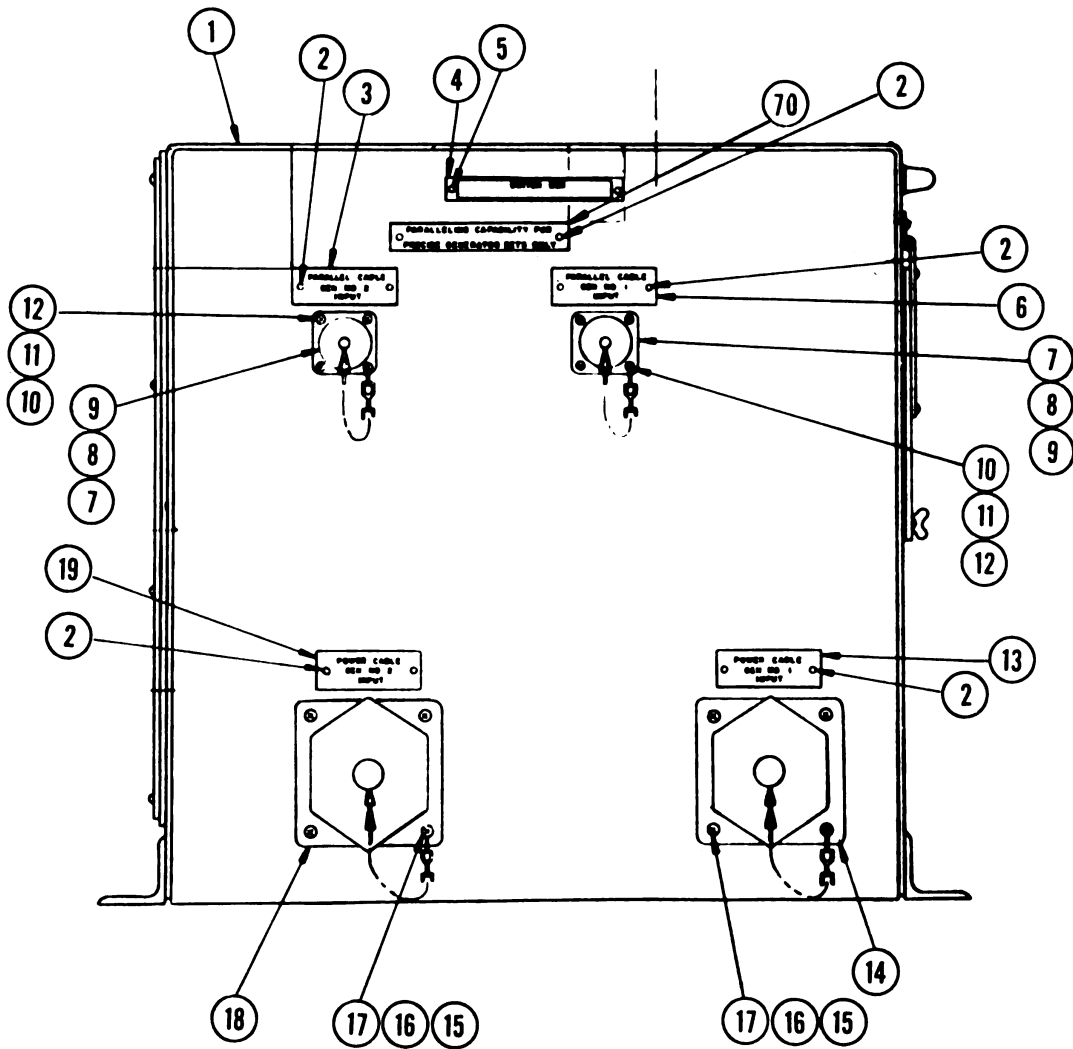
Switchbox Assembly (Sheet 1 of 7)
